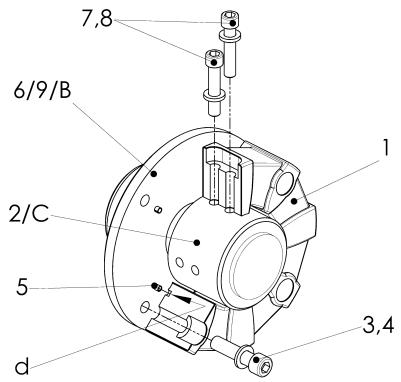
Mounting the rubber element (Type 008A-00400...00600-.N..)
